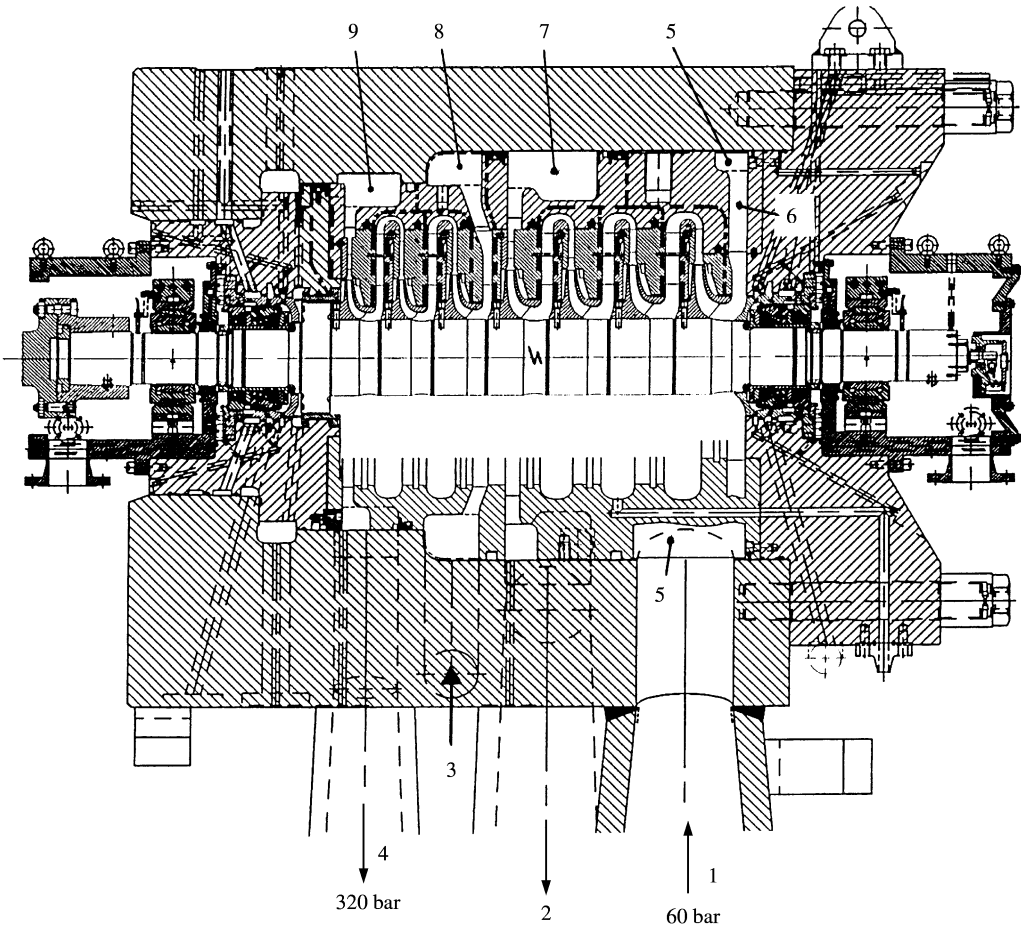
Geometry of the compressor showing its two sections and their inlet and outlet scrolls. The first section of the compressor consists of four stages (i.e., four impellers) and the second section has three stages: 1, inlet to first section; 2, discharge from first section; 3, inlet to second section; 4, discharge from second section; 5, inlet ring chamber (scroll) of first section; 6, supporting struts (see Figures 2 and 3 for details); 7, exit scroll of first section; 8, inlet scroll of second section; 9, exit scroll of second section.
